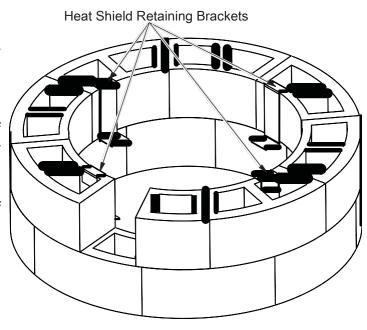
Heat Shield Retaining Brackets (MM2FR Shown)
